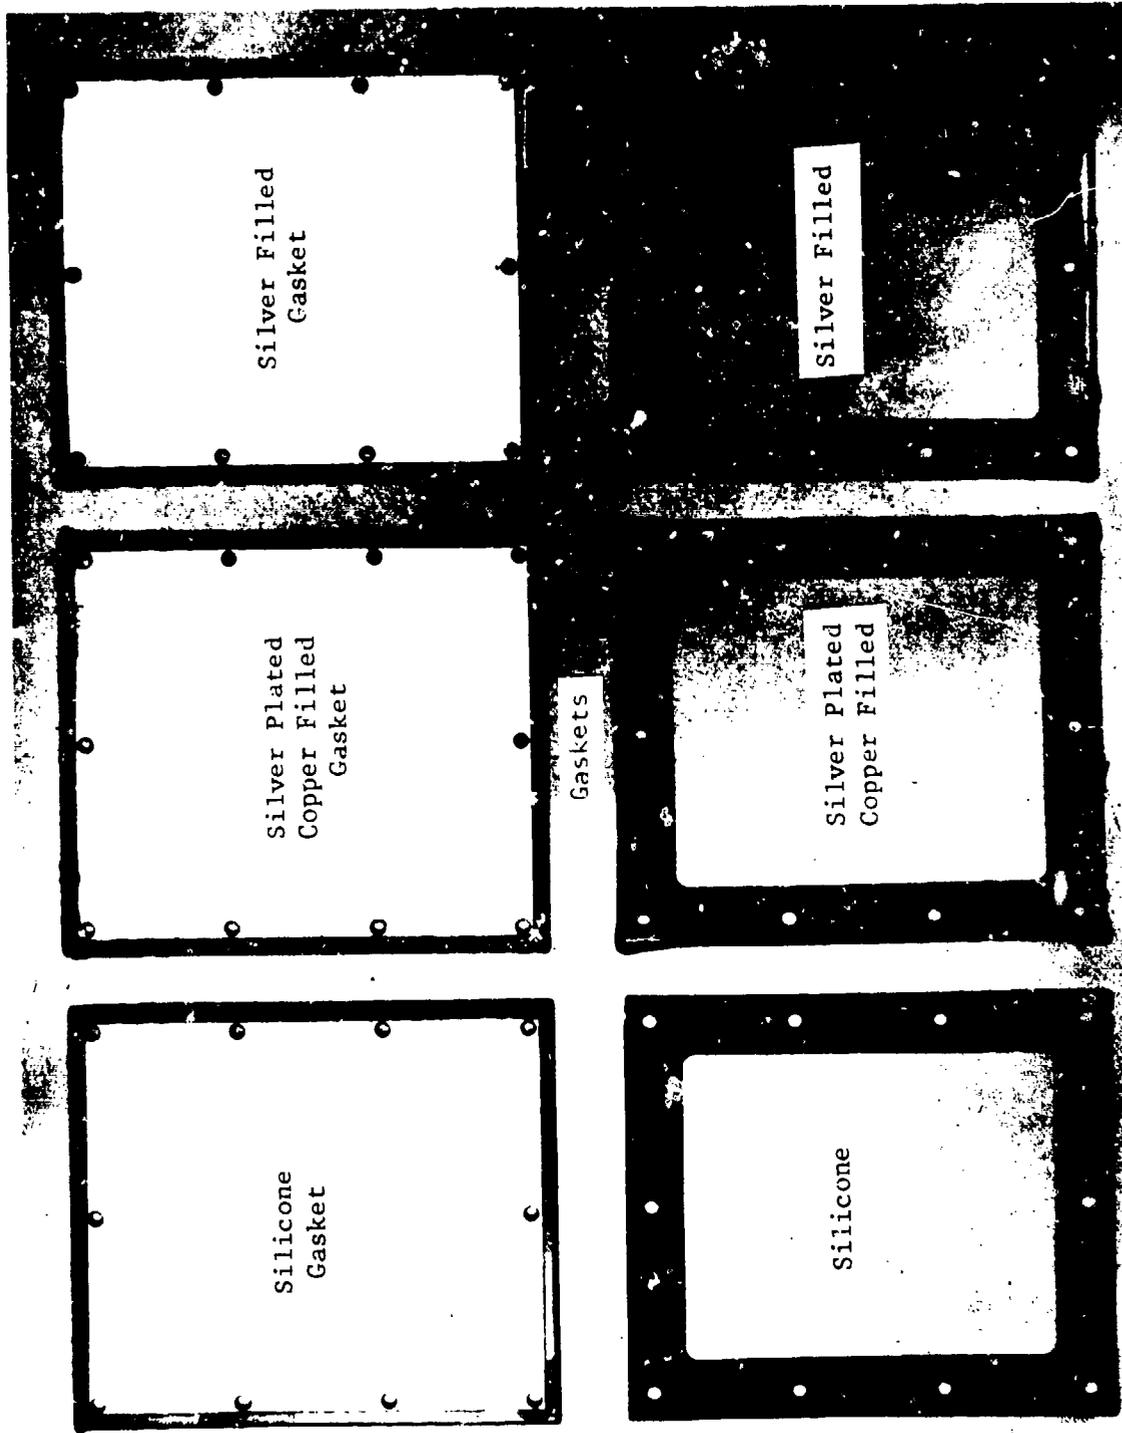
GASKETS AND COVERS OF EMI SEAL ASSEMBLIES AFTER EXPOSURE
